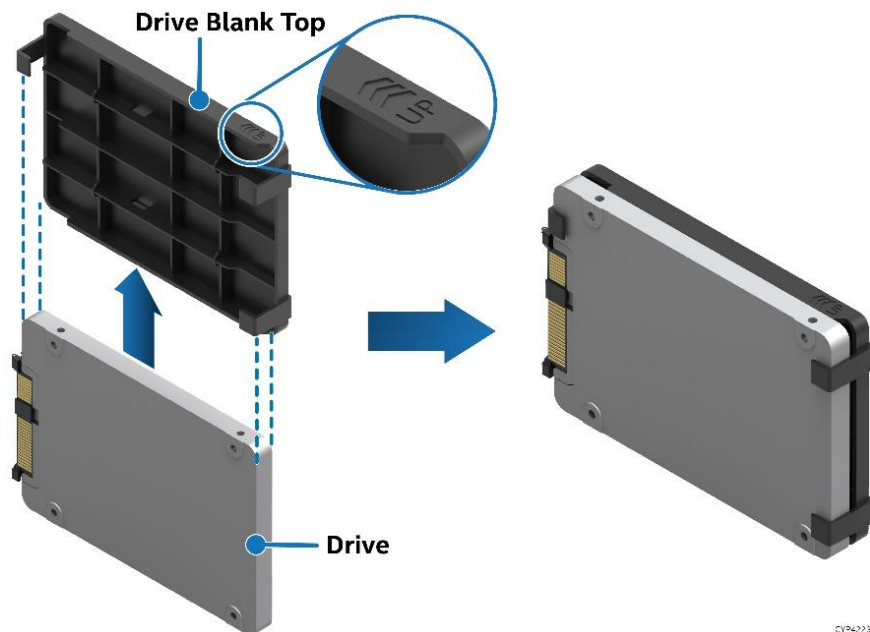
Assembling the 2.5" SSD Drive with the Top Part of Drive Blank
